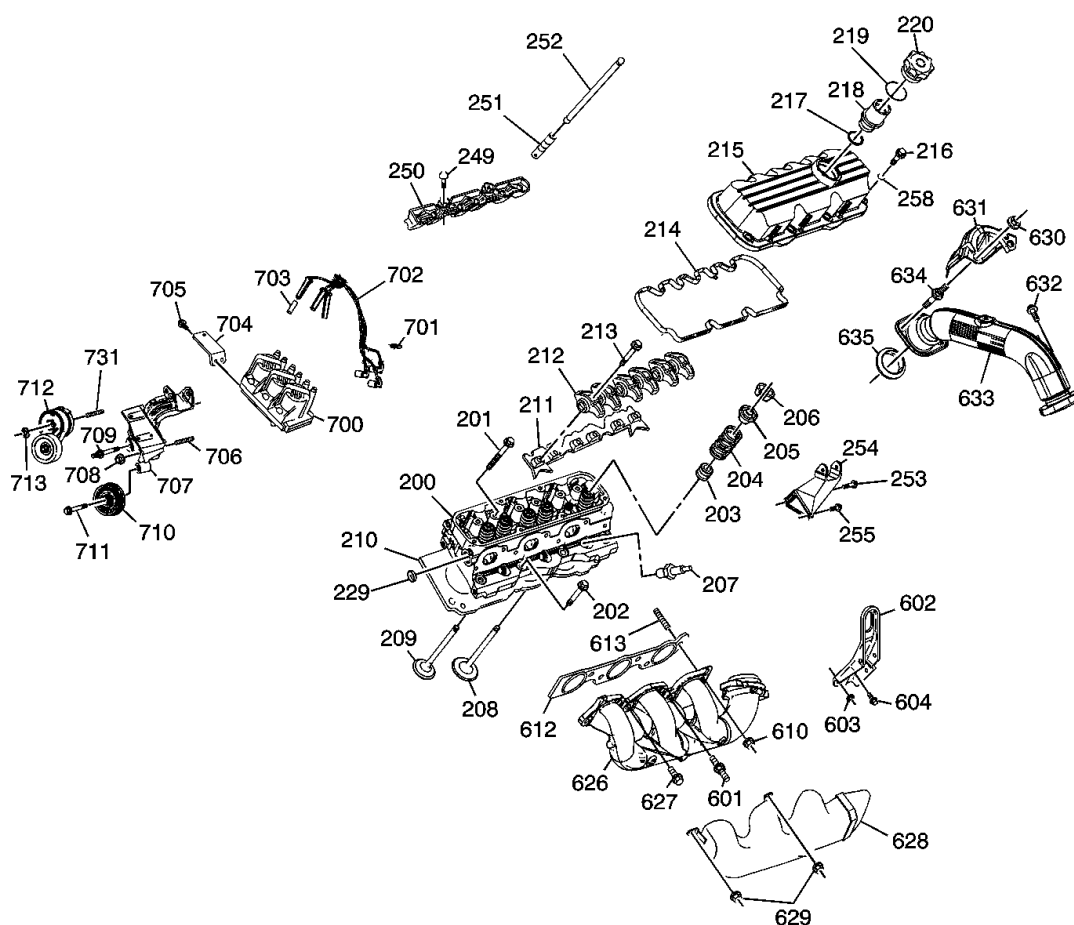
Cylinder Head & Components Disassembled View - Left - L67
